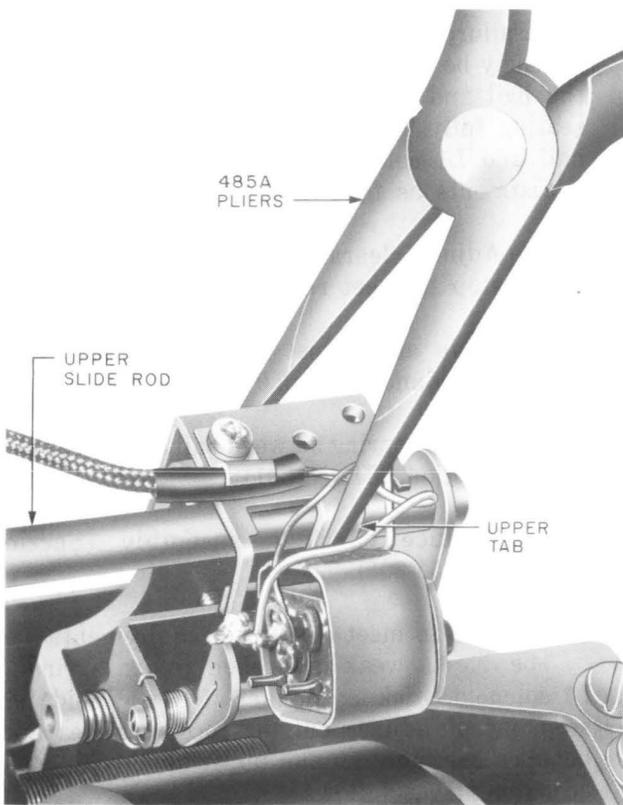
Method of Adjusting Upper Tab for Minimum Clearance
